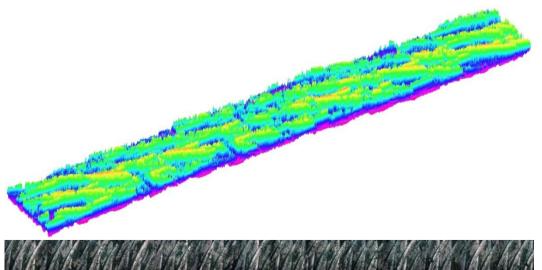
The 2D and 3D images of the surfaces machined with the carbide milling cutter (the fifth mode).
